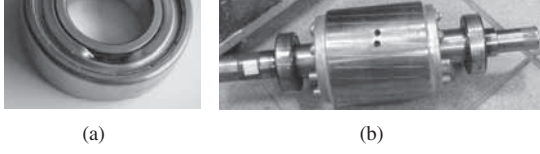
Fault motors: (a) Denting the seal of the bearing to simulate bearing fault; (b) Two holes are drilled on the rotor bar to simulate broken rotor bar.
